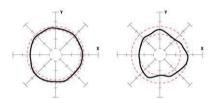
These two plots of shafts illustrate different roundness tolerances. On the left, a proprietary centerless grinding process produces shafts with a roundness tolerance of 0.002032 mm to ensure uniform distribution of bearing loads for maximised bearing travel life. Rounder = longer bearing life. (Image courtesy of Thomson Industries, Inc.)
